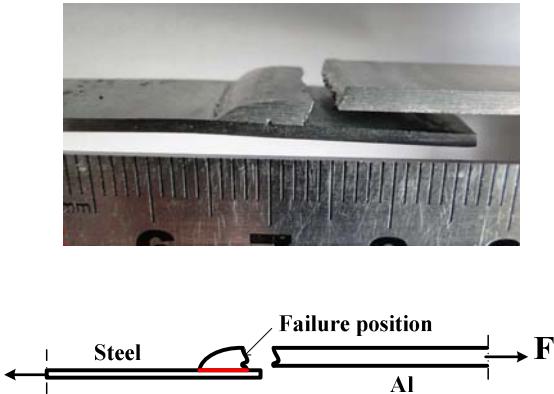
Fusion line fracture mode of CMT brazed lap joint
